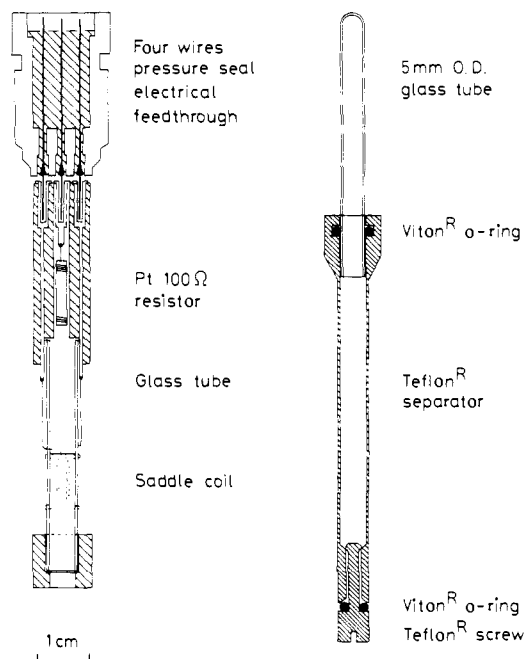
Pressure seal and internal components of the bomb (left); sample tube and separator assembly (right).
